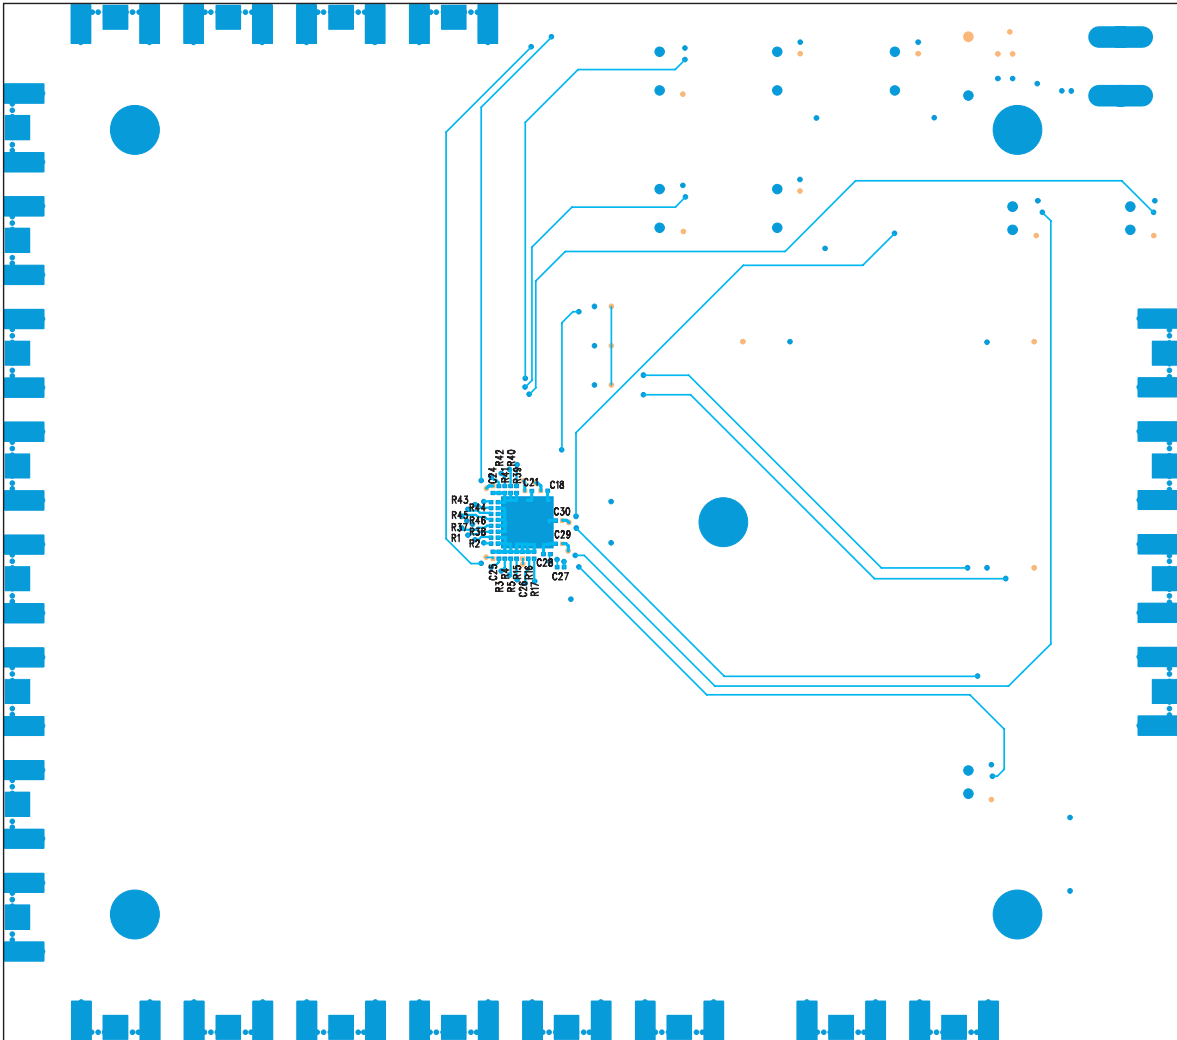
MAX3673 EV Kit Component Placement Guide—Solder Side
